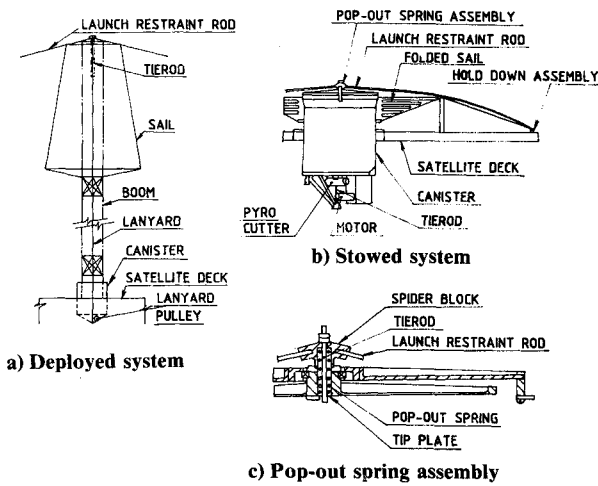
Deployed and stowed configuration of the boom and sail assembly.
